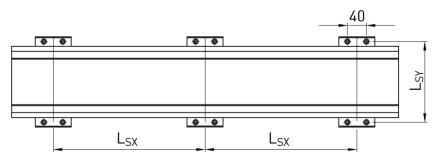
Mounting with clamping profiles - HT200S, HT250S
